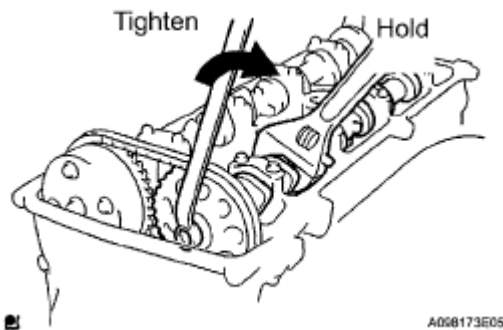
Tightening Camshaft Timing Sprocket Set Bolt
